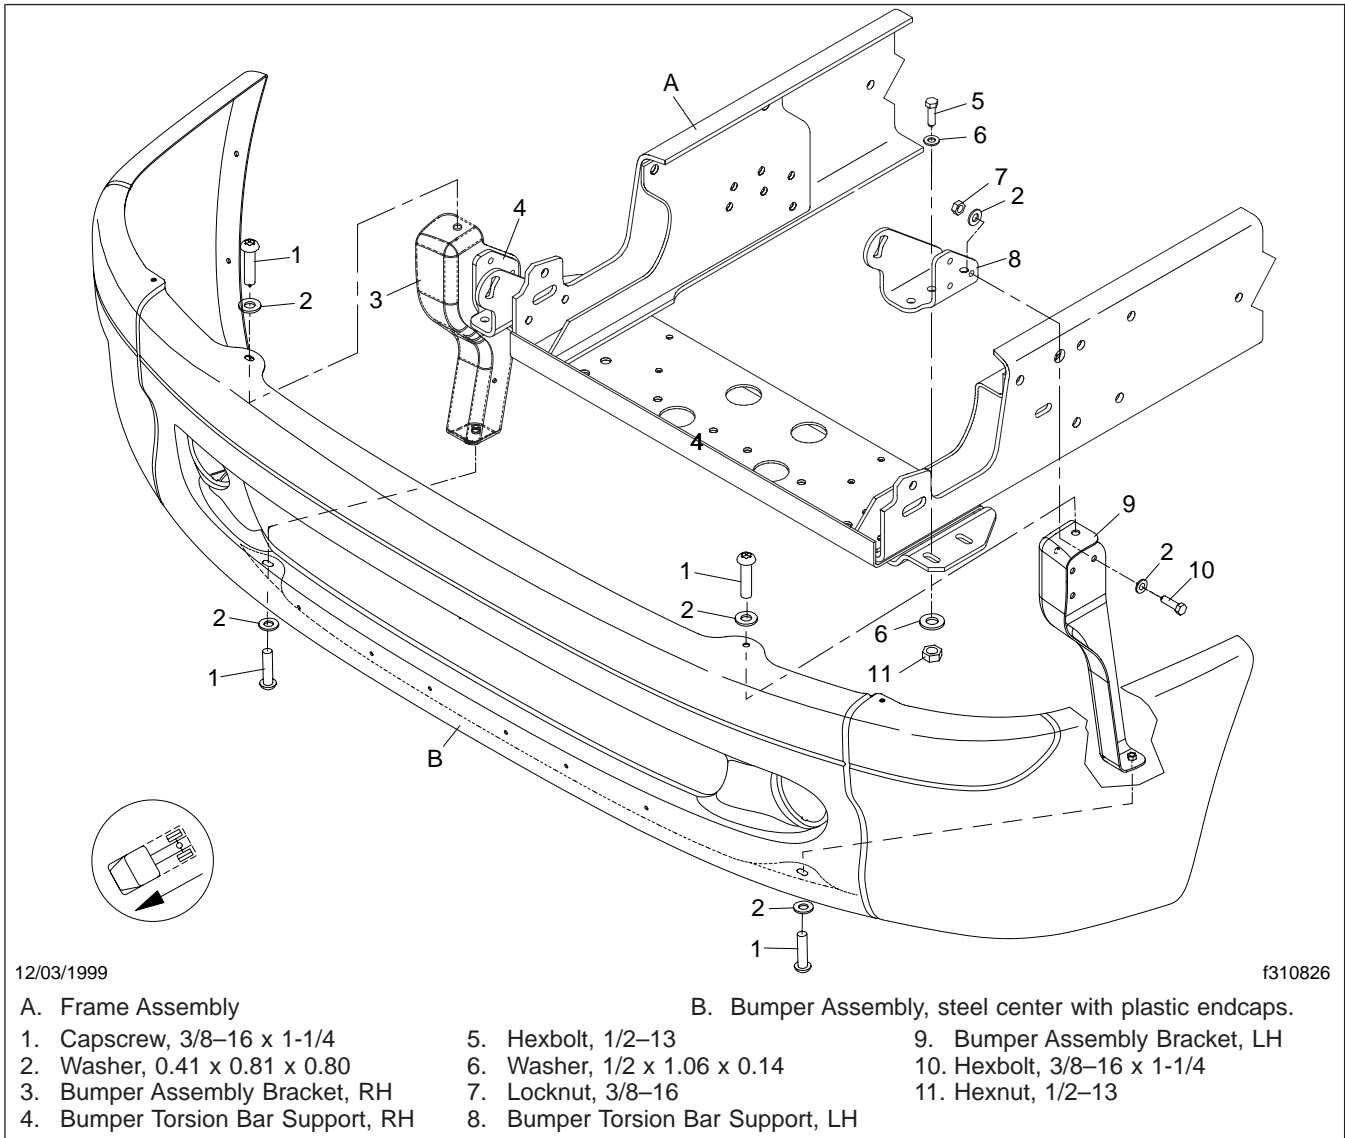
, Bumper Installation, 1200-sq-in Radiator
